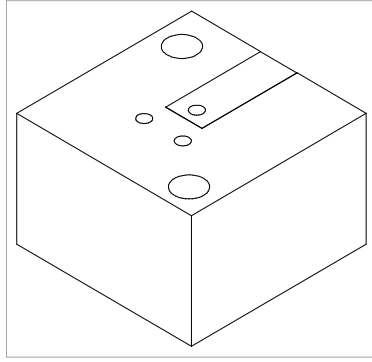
A Schematic of a fixture that has been formed by combining both the fixtures shown in Figure A.1 and Figure A.2
